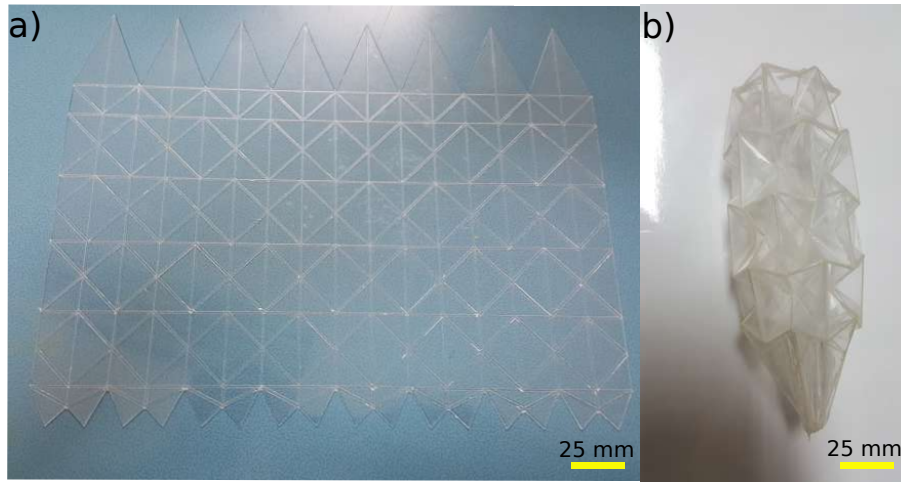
2D fabrication technique using CNC machining. (a) Axpert sheet with 0.75 mm thickness patterned from both sides using a CNC machine then (b) manually folded.
